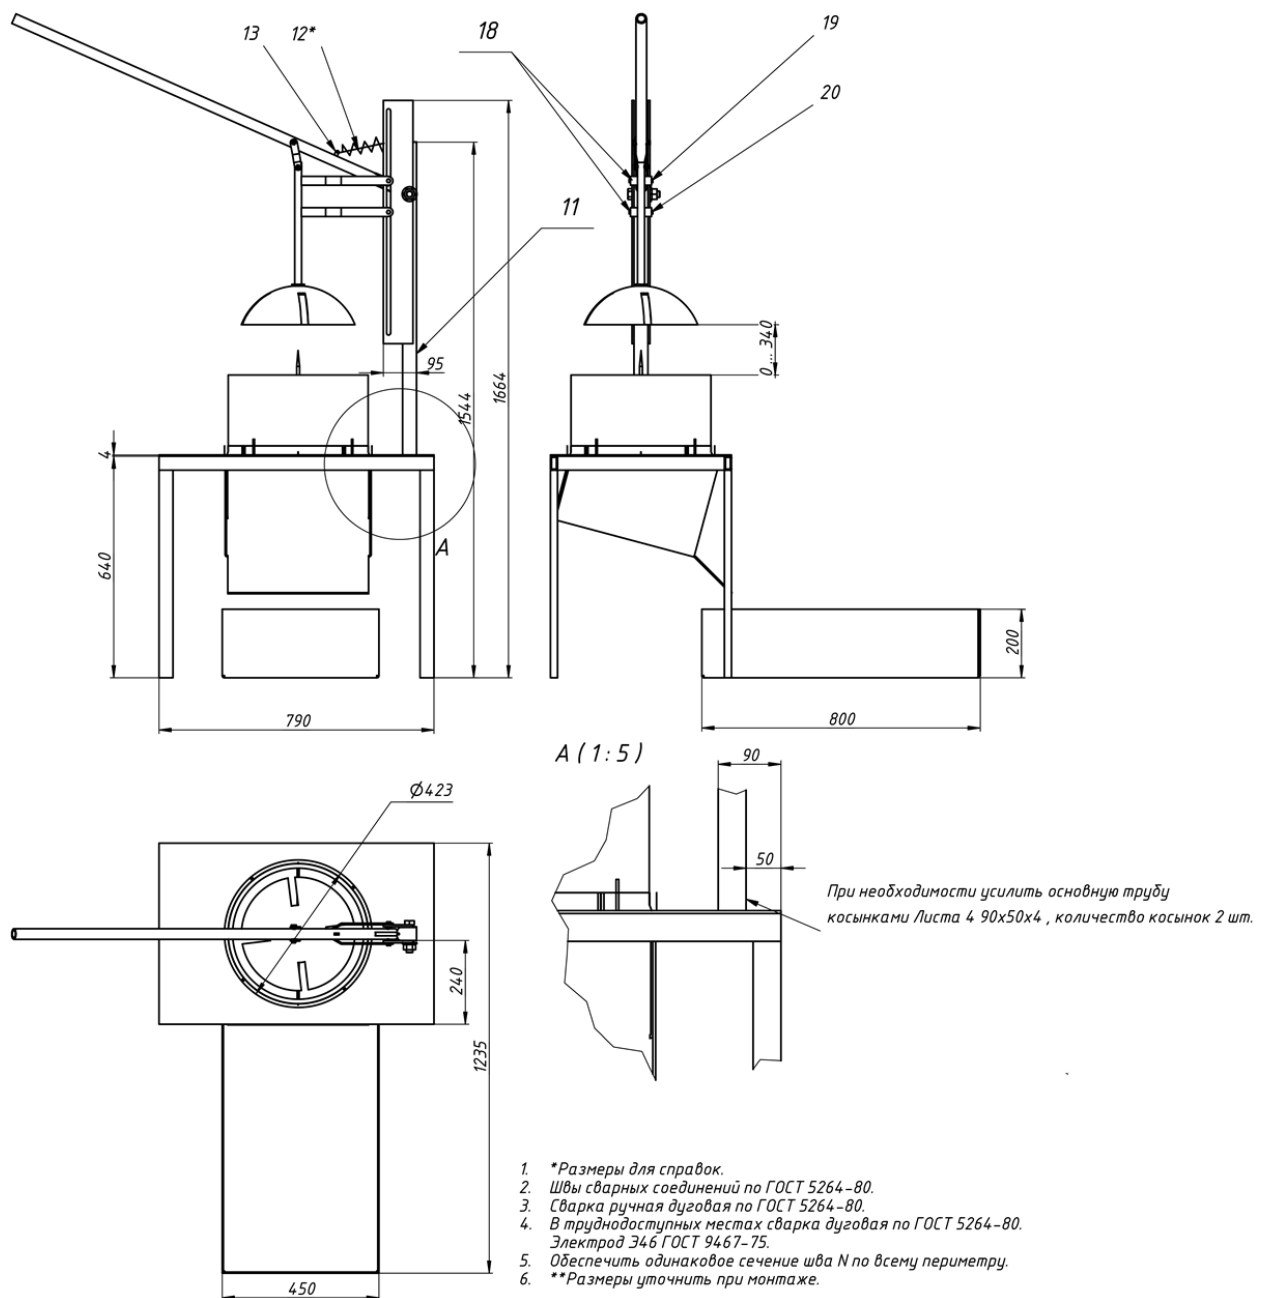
Device for cutting watermelon and pumpkin into equal parts
